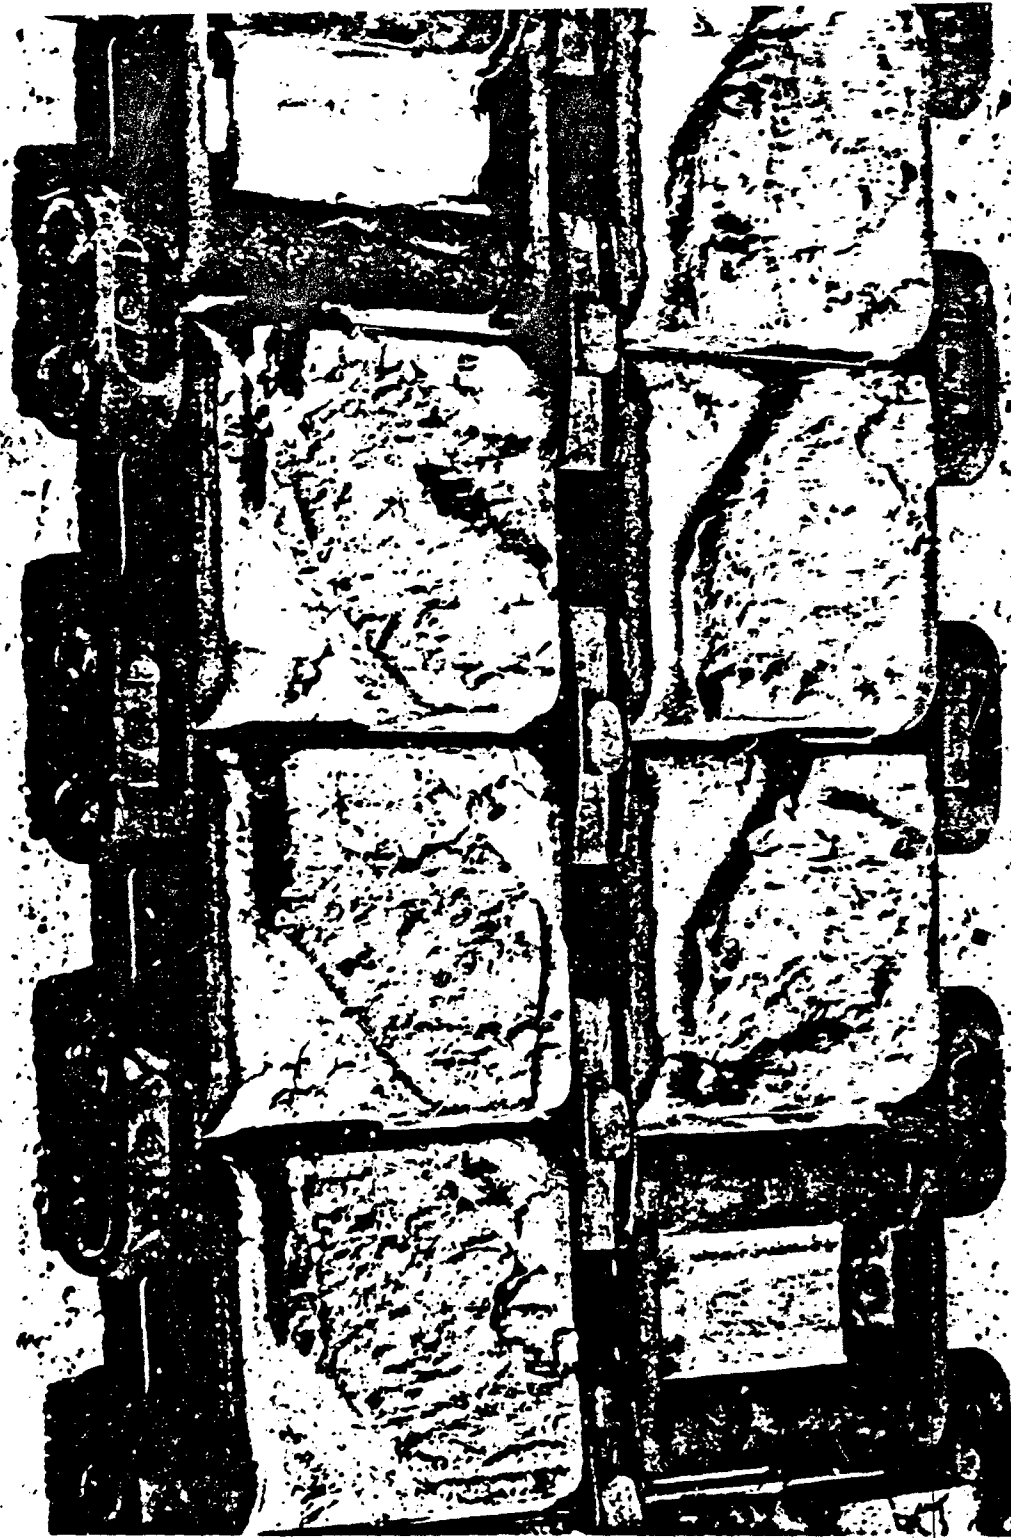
Road pad side of five T-156 pitches with removable pads after 500 miles.
